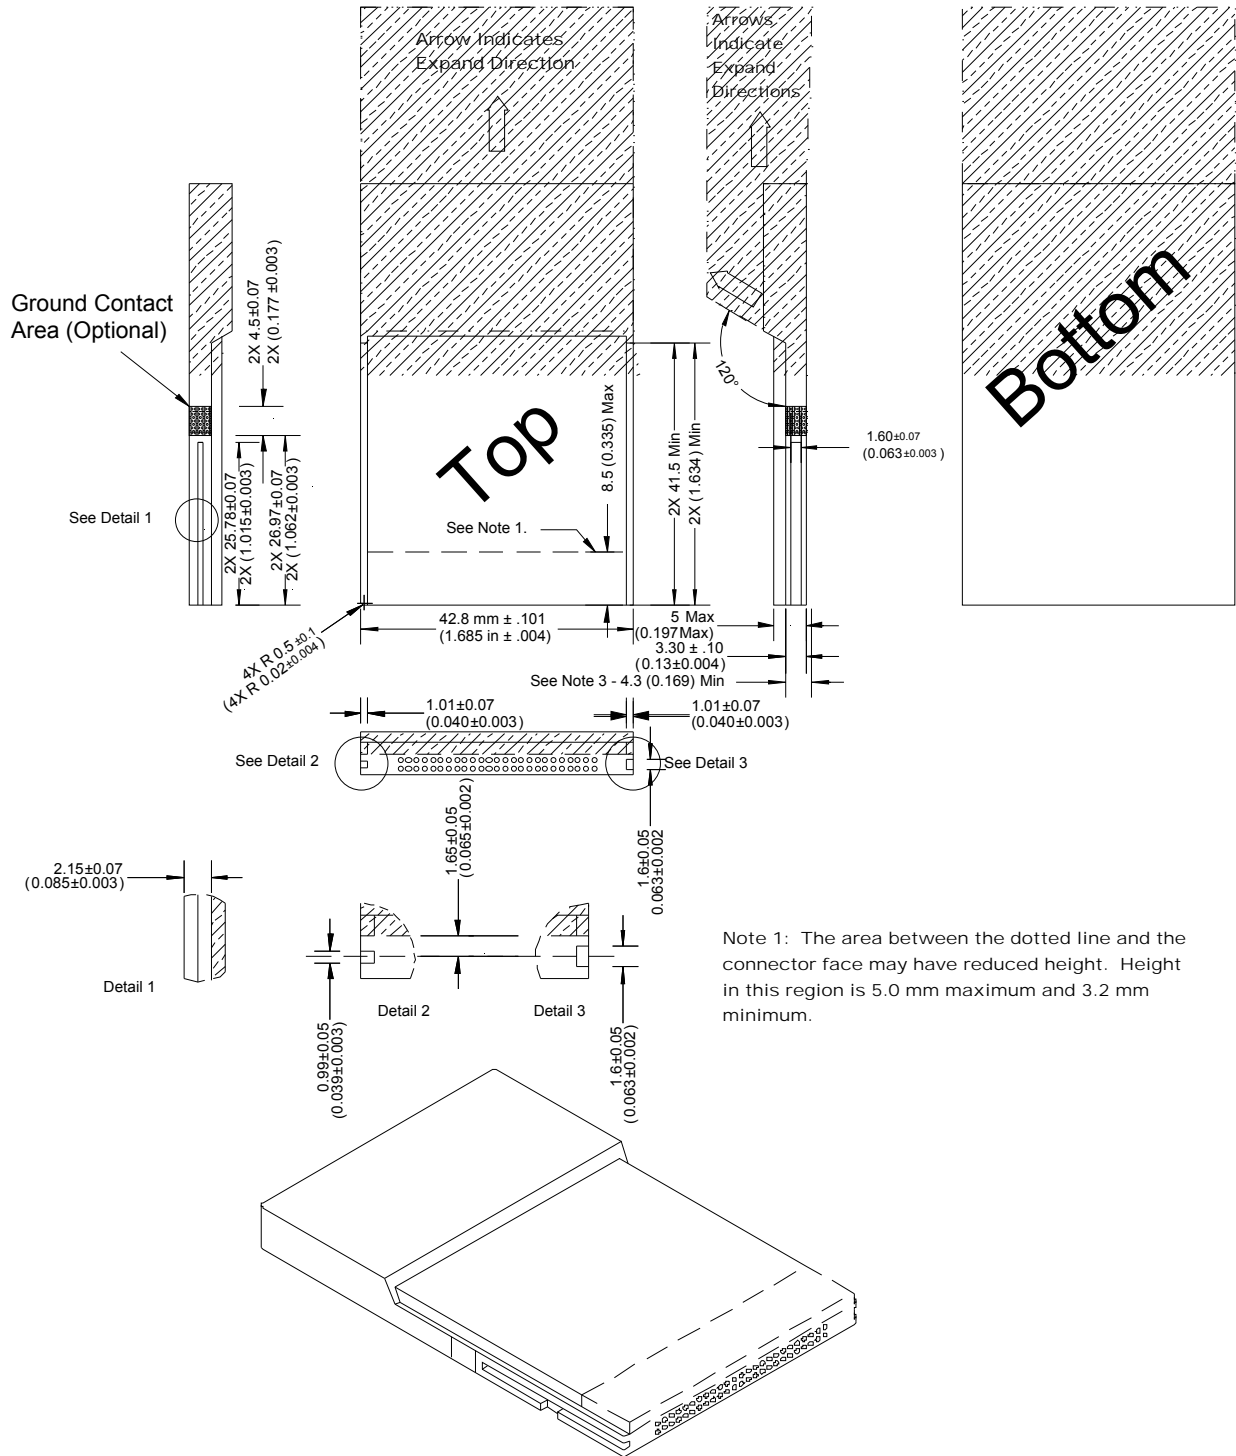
Longer Type II CompactFlash Storage Card and CF+ Card Dimensions
